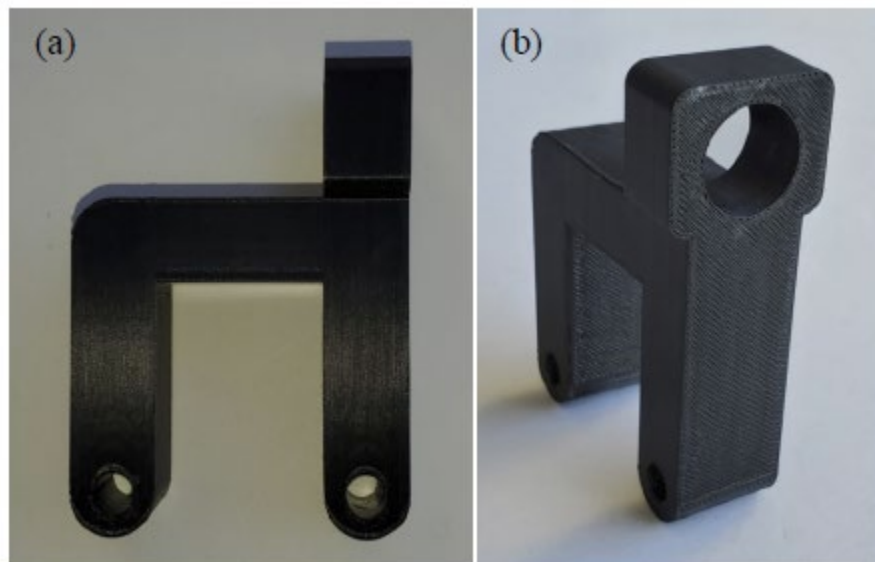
3D printed worm shaft support: (a) and (b) are two different views of the part.
